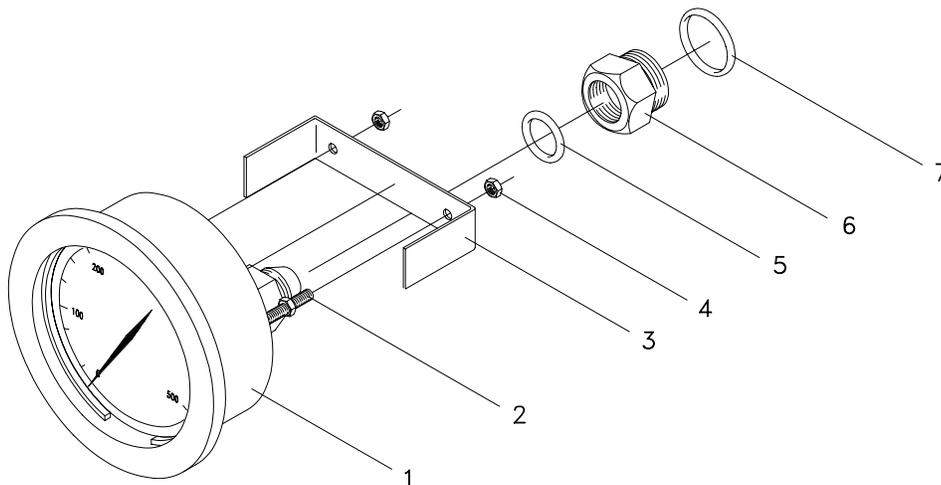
LP Pressure Gauges (ALP-G212, ALP-G315, ALP-G317)
